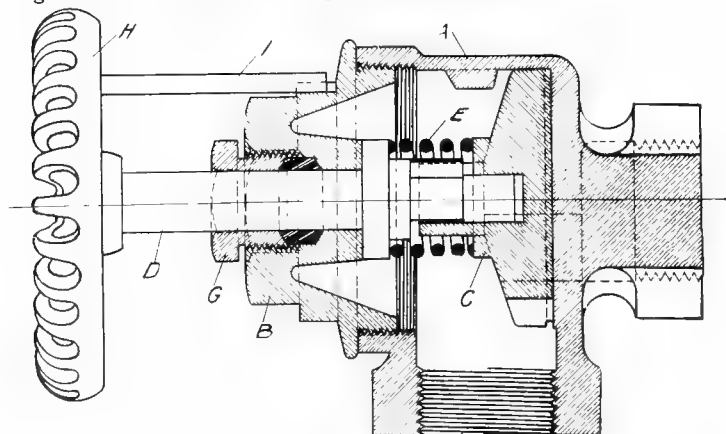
Section Through Valve Shown in Fig. 2135.
